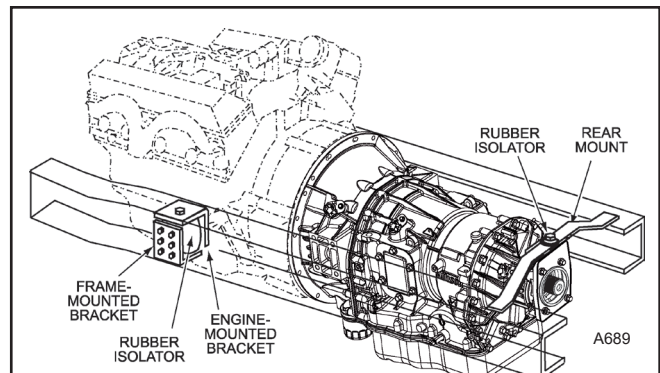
Using Park Brake Mounting Pads for Attaching Rear Mount Bracket – 1000/2000 Product Family
